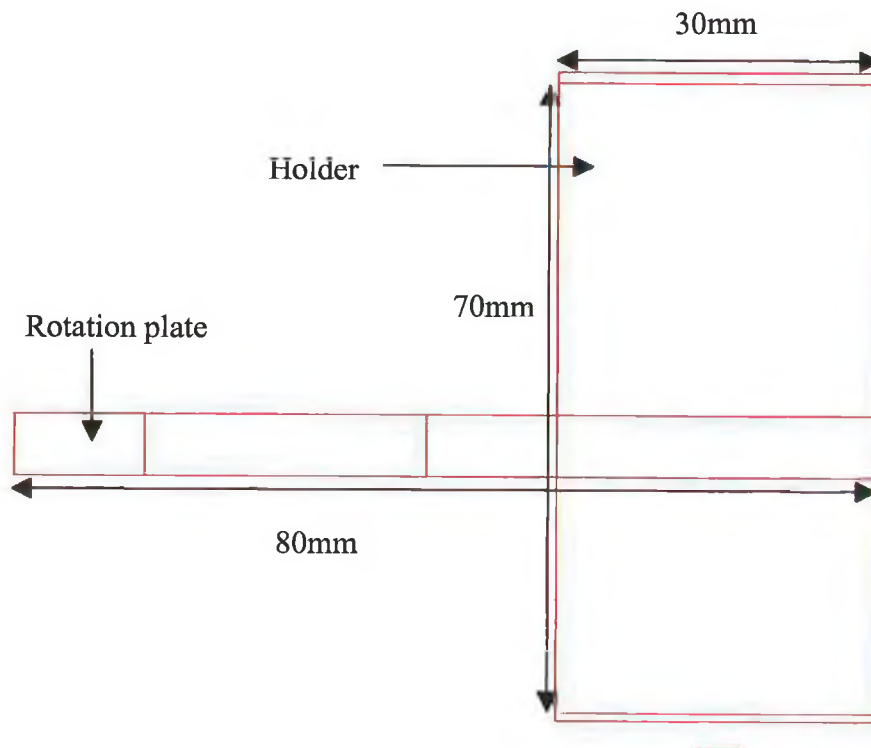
Side view of the rotation plate and fiber optic holder.
